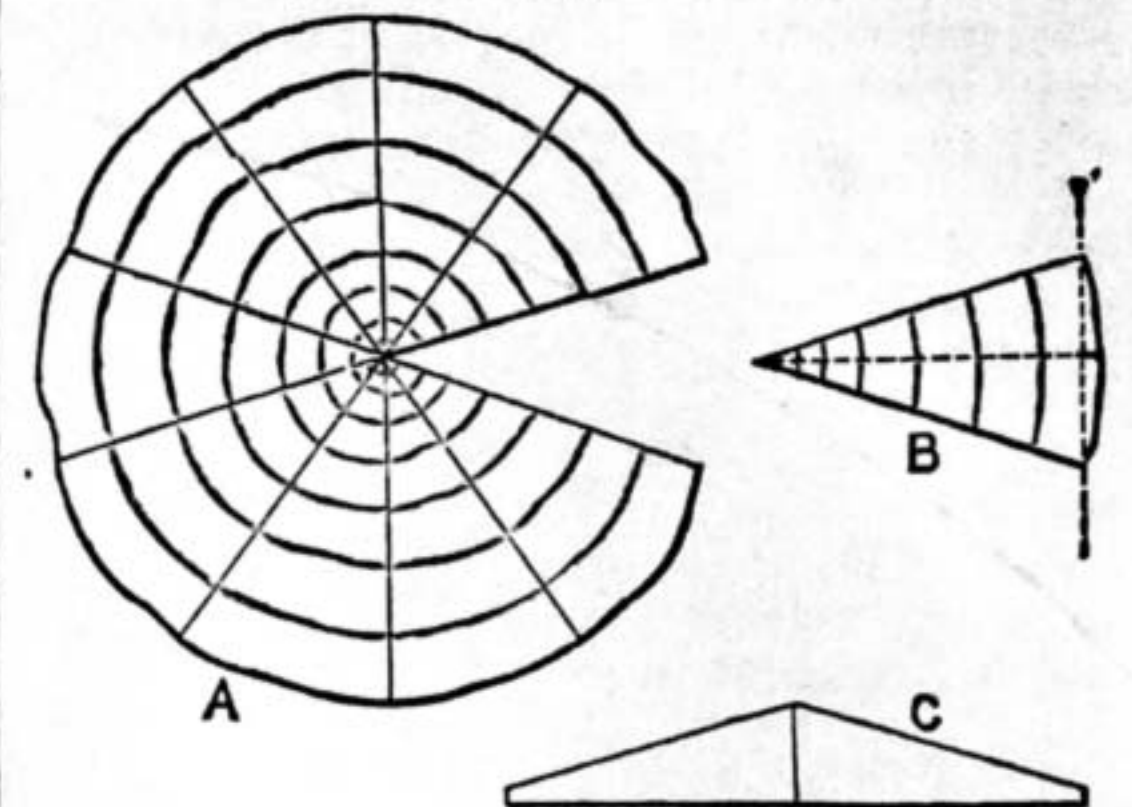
A, Section of Sycamore or Pine, cut on the quarter; B, Piece marked for sawing down; C, Ditto, jointed, ready for Use.
